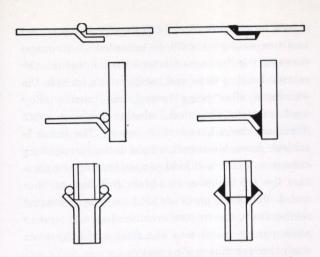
These three before-and-after diagrams show how properly placed brazing alloy will be drawn through the entire joint by capillary attraction to form smooth fillets and good solid joints.
